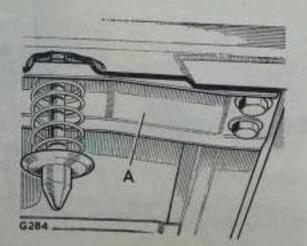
Bracket for bonnet striker pin, early type A-Bracket bolted to bonnet
